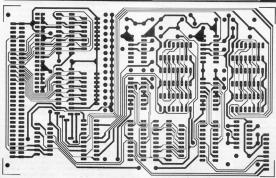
The printed circuit board for the power circuit. This board may be cut into parts which may then be fitted in the housing of the equipment being controlled (cut at dashed lines).
